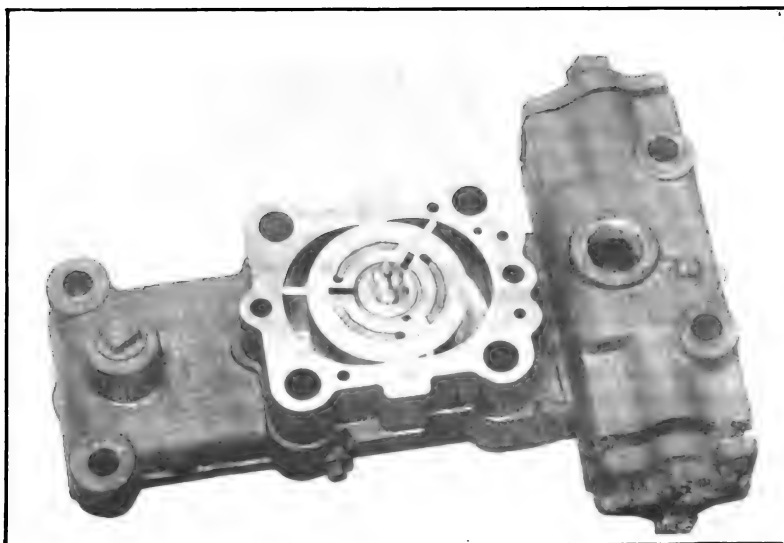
Rotary Engine for Operating Valve of Harrison Coal Pick.
